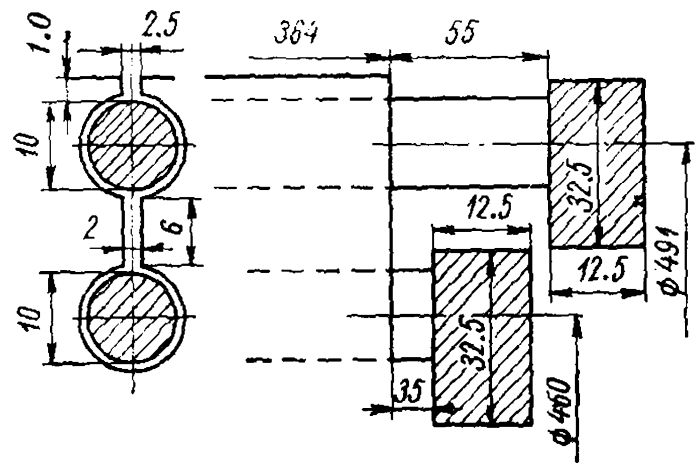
Shape of slot of rotor with a double squirrel cage
